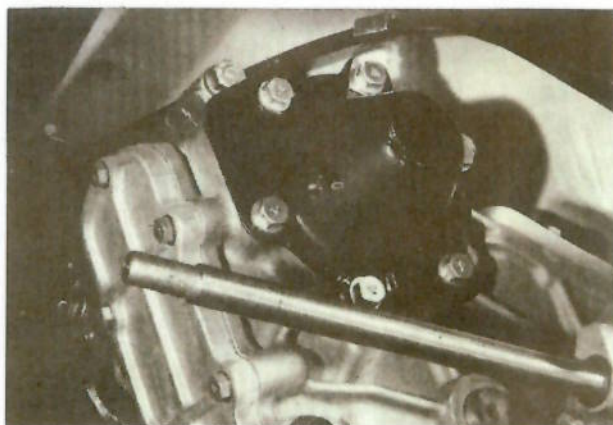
POSITION OF PARKING BRAKE FLEXIBLE WIRE HOUSING CLAMP ON SPLINE SHAFT CAP.
